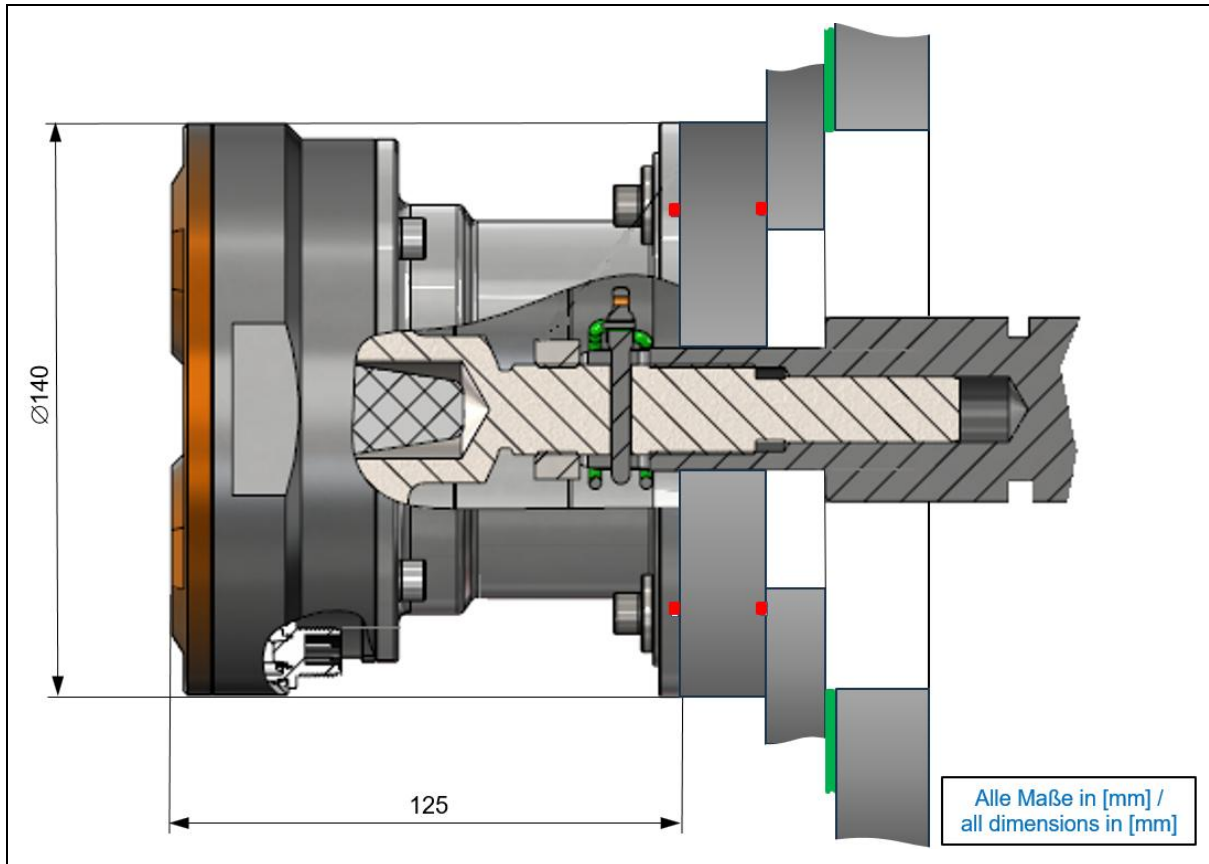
BEAROMOS® 2020 with installed crankshaft seal system
